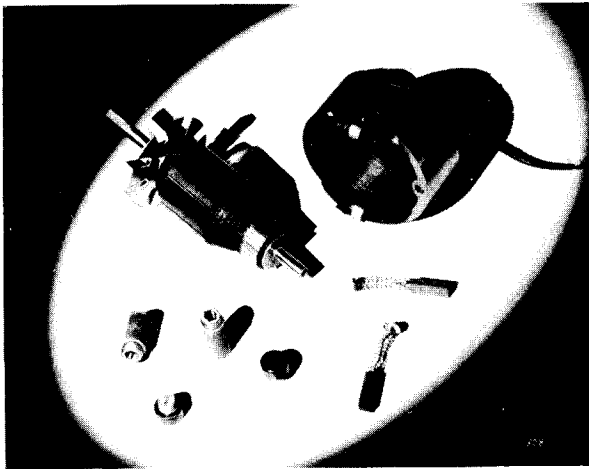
Parts of a universal motor. (*The Dumore Company.*)
